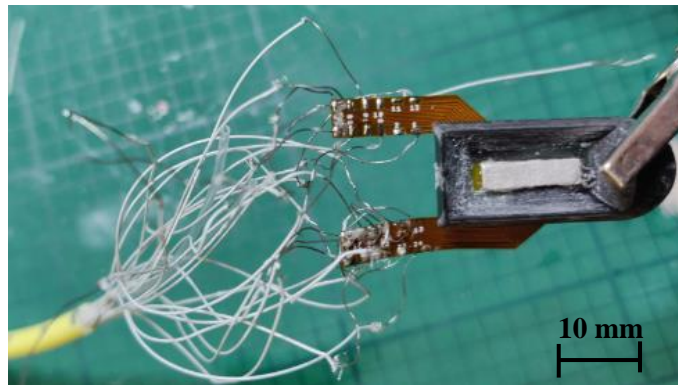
Soldering of the Microcoax Cables to the Flexi PCB
